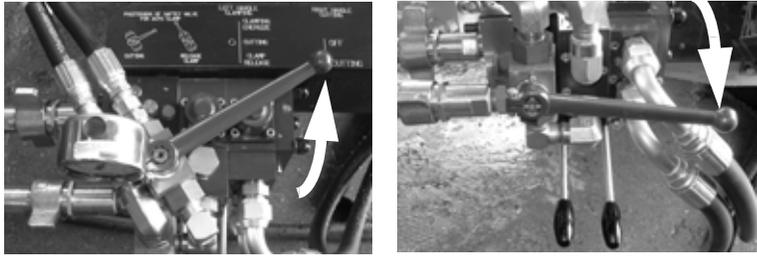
Close both clamping circuit valves after you have disengaged the autoclamp.
